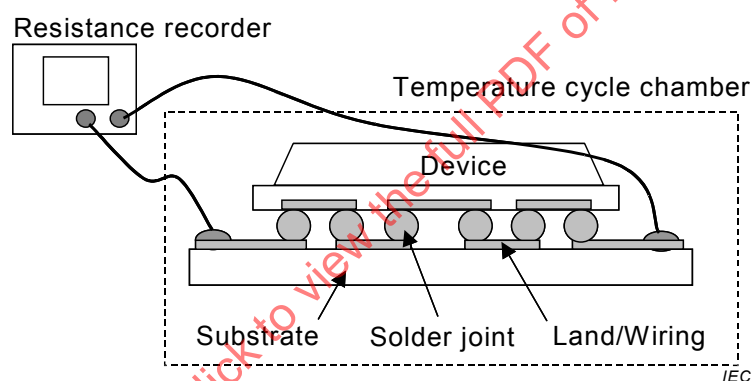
Example of a test circuit for the electrical continuity test of a solder joint
